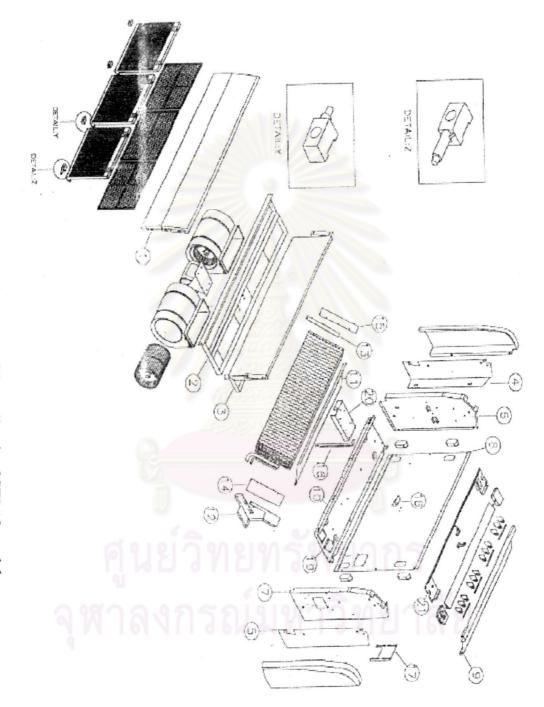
; Design parts of fan coil unit of SFJ-18 model
